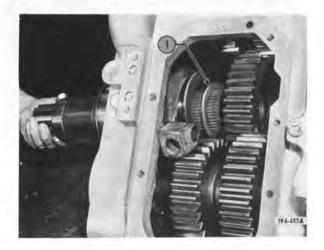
Removing L0-Range Gear Front Thrust Washer
